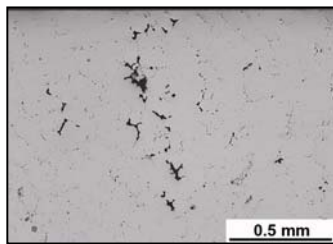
Casting defects at the longitudinal axial section of the specimen gauge length, batch 2
